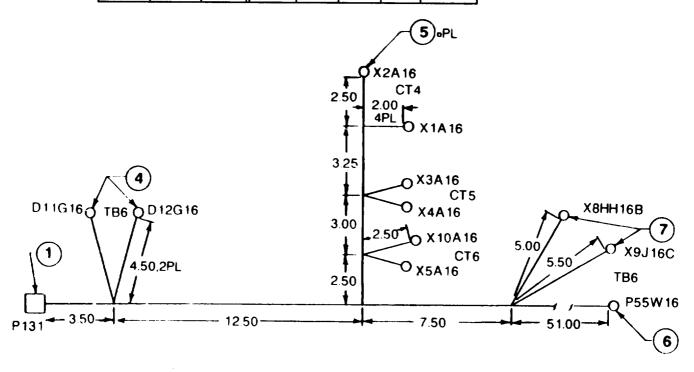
AC Power Control Wiring Harness, Drawing No. 72-2259 (Sheet 2 of 2)
